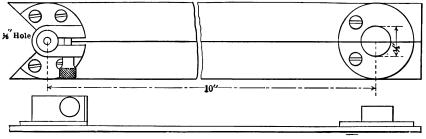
TOOL FOR LAYING OUT ANGLES
